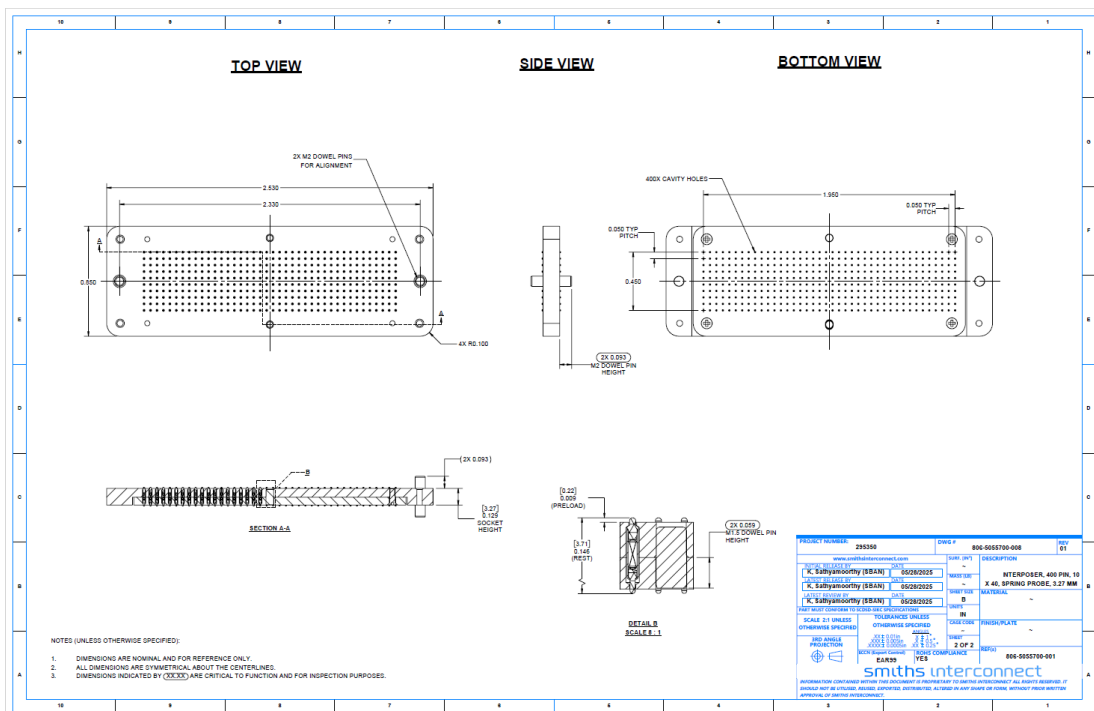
806-5055700-008 Drawing (Sheet #2)
